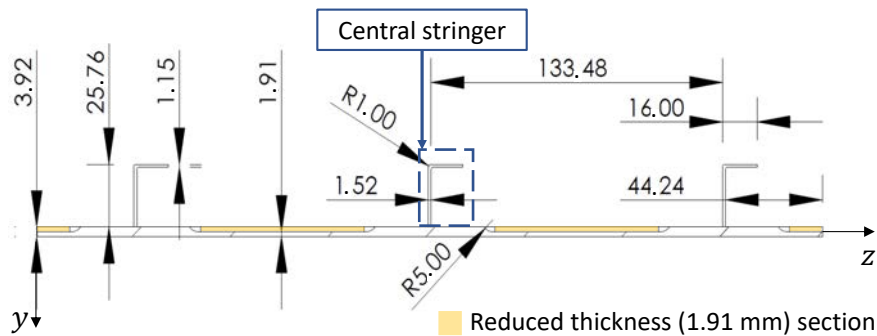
Section A - Section view of the panel. The section A is defined in Figure 1. All dimensions are expressed in mm.
